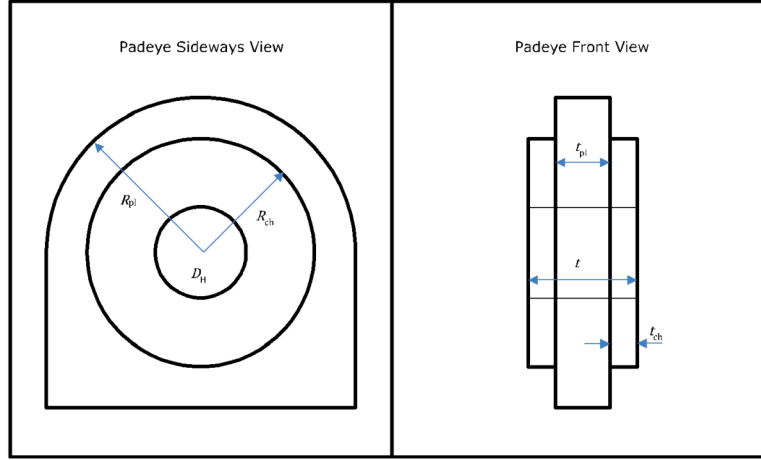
Typical padeye layout from DNV-ST-N001 [5]
